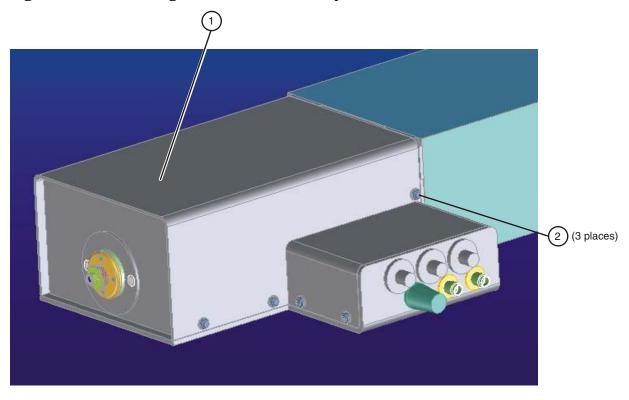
New Design Combiner Assembly and mm-Wave Module: View 1
